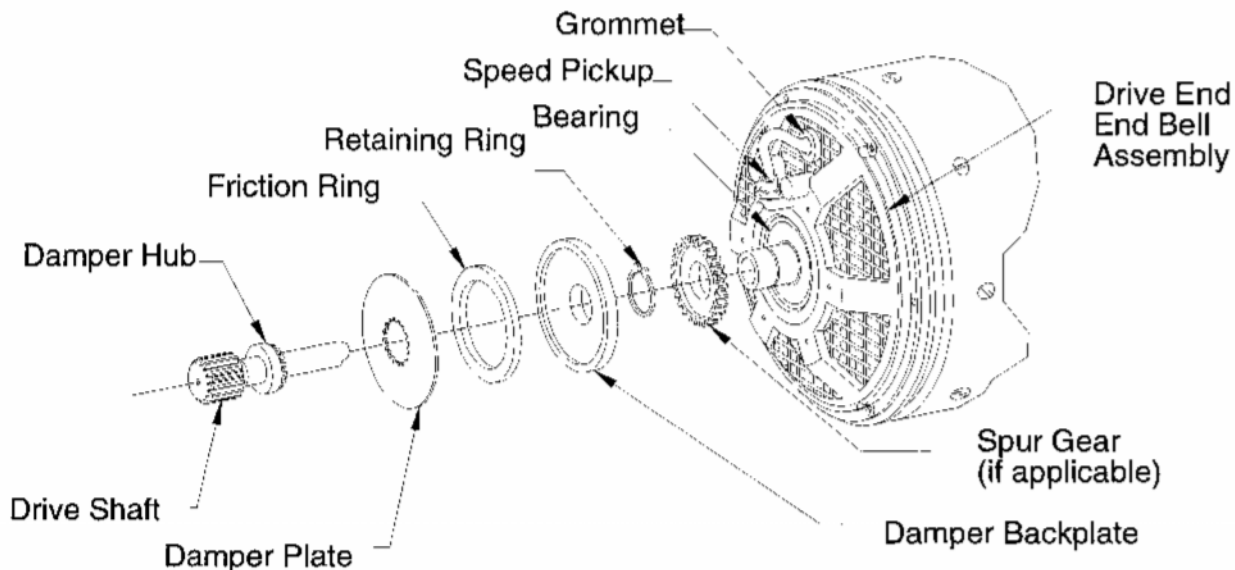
Drive End End Bell Assembly, Shaft, Dampener Assy., etc.
